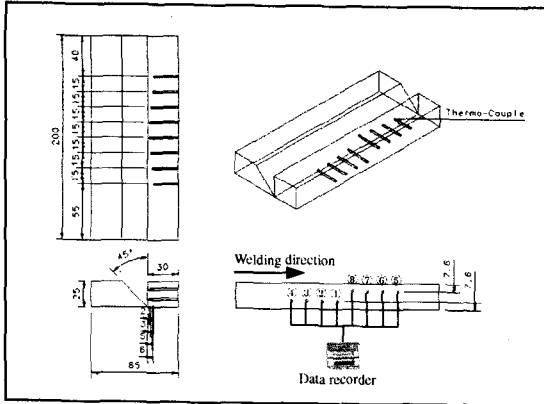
Schematic drawing of welding specimen and the location of thermocouples
